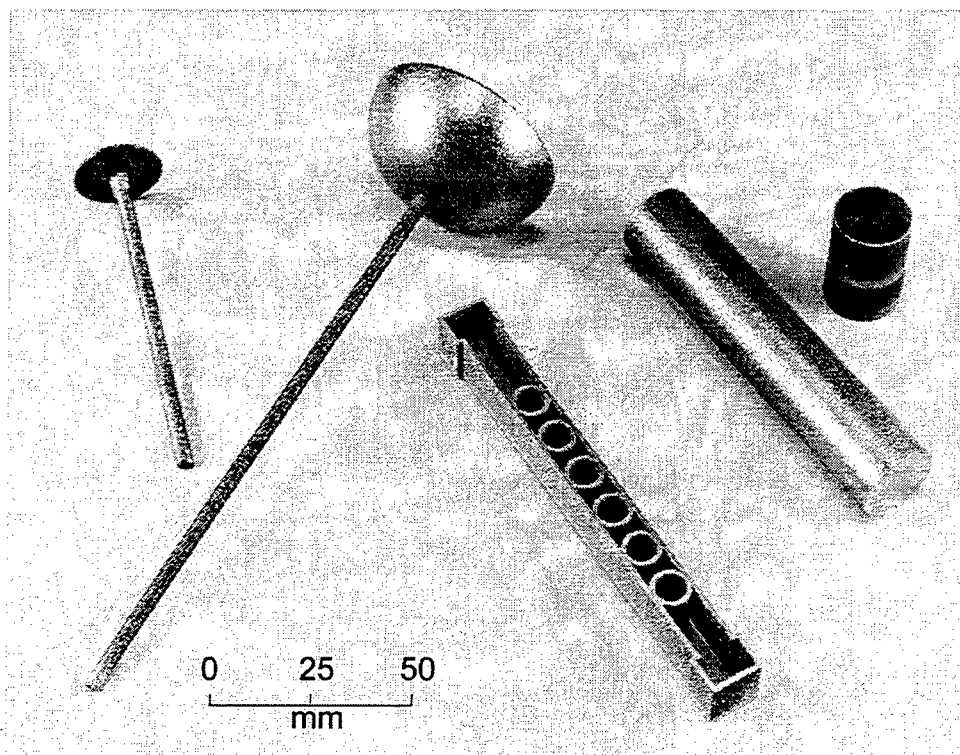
Representative DLF parts and assemblies. From left to right, tantalum stem and disc, 316 stainless steel stem and hemisphere, 316 stainless steel tube assembly and housing, and Inconel 690 solid cylinders.
